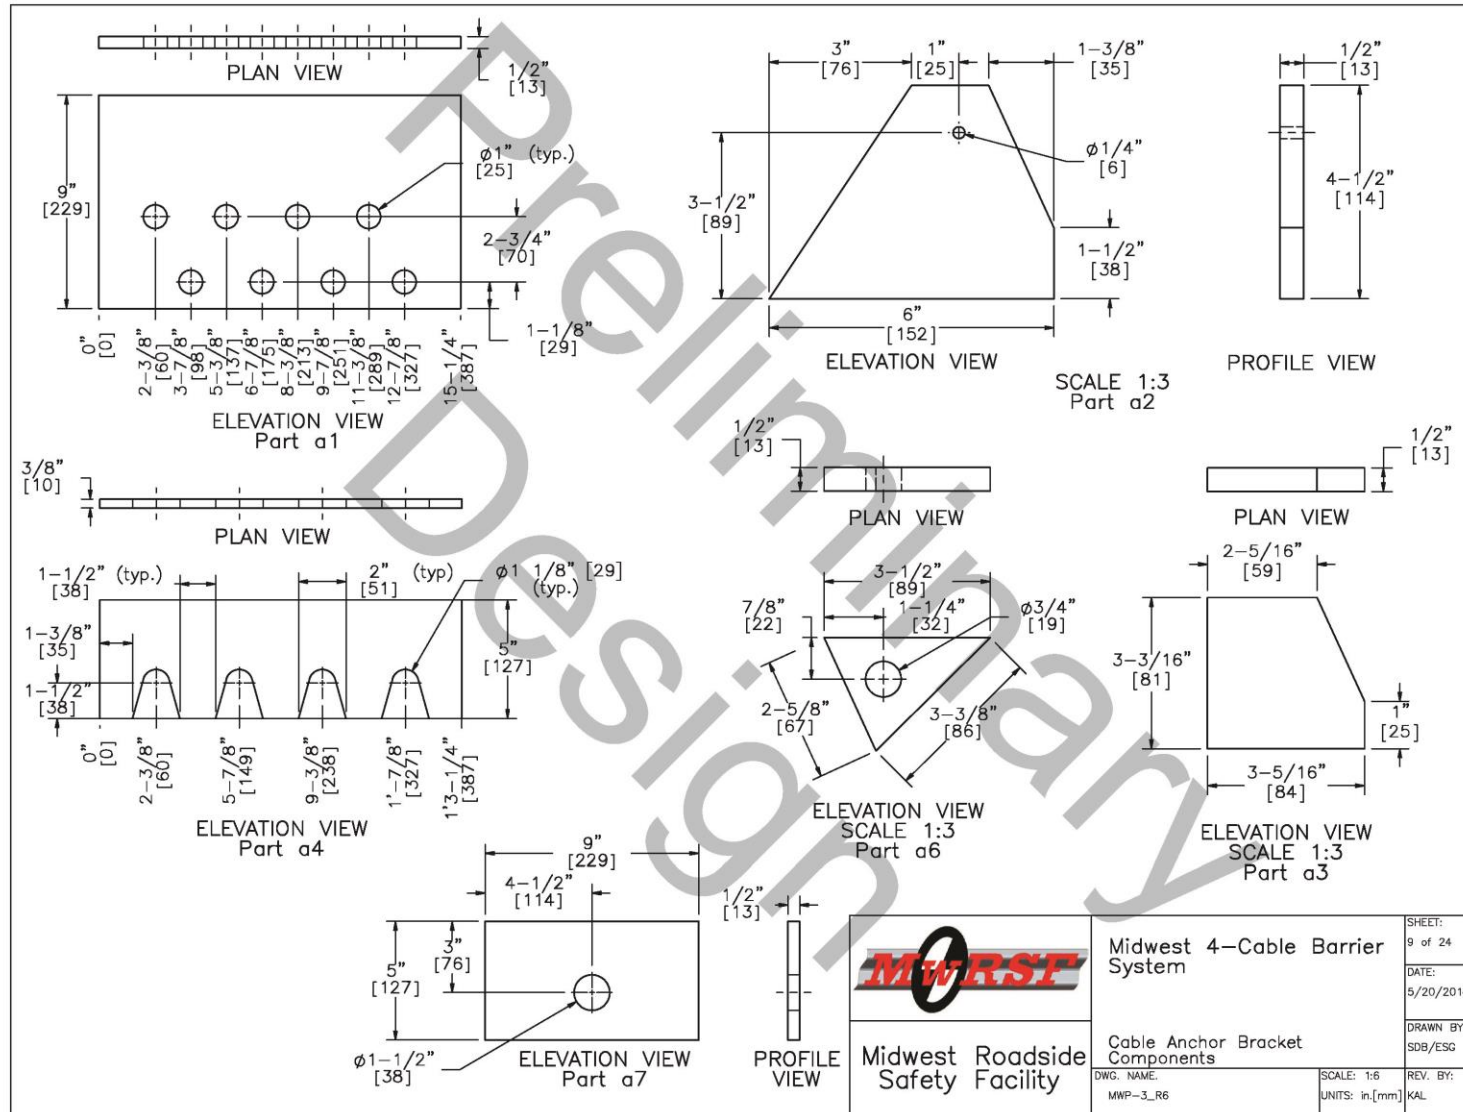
Cable Anchor Bracket Components, Test No. MWP-3
